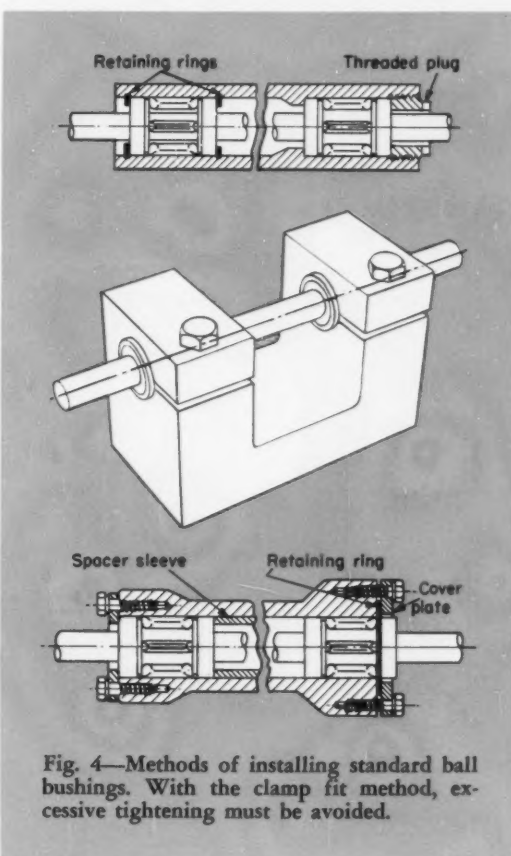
Methods of installing standard ball bushings. With the clamp fit method, excessive tightening must be avoided.
